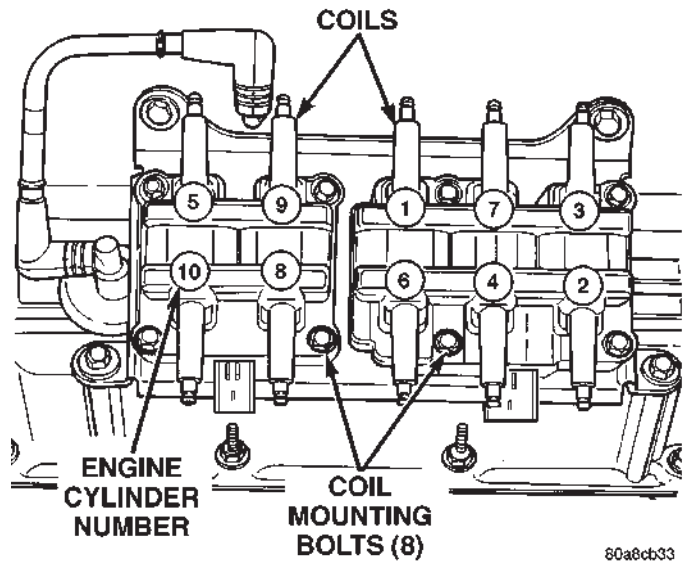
Ignition Coil Packs—8.0L V-10 Engine
